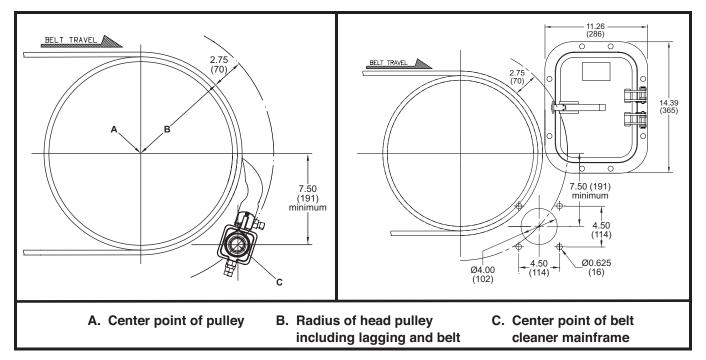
Belt Cleaner Mainframe Location & Chute Wall Cutouts
